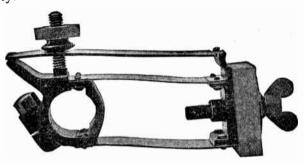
Western Electric parallel spring brush holder as used on the larger machines.
